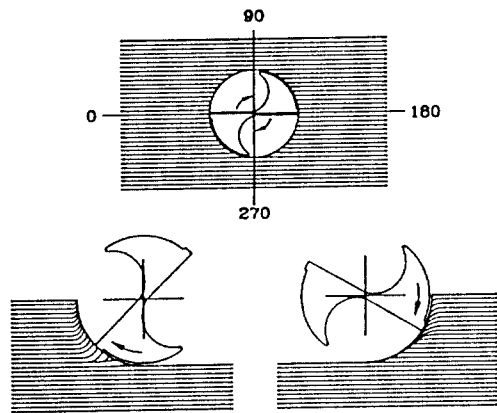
Drilling mechanism of the CFRP in x-y surface
